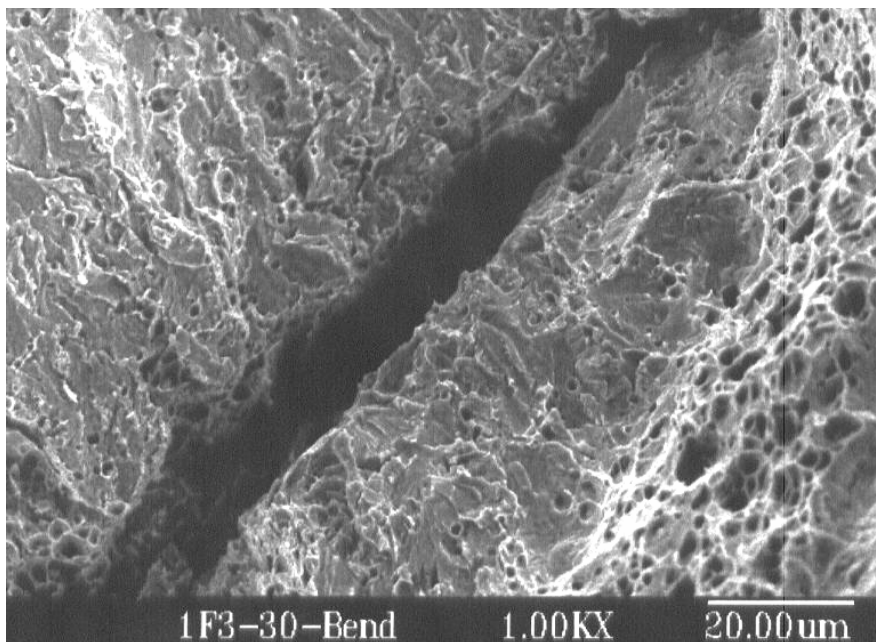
A micro-crack oriented perpendicular to the bend-test fracture surface acting as an initiation point for brittle fracture.
